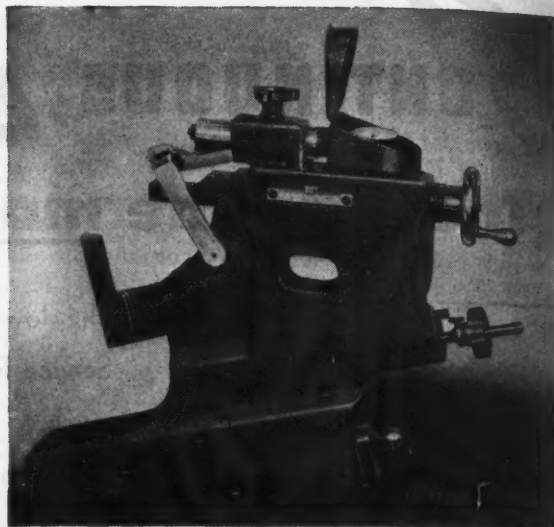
Close-up View of Work-locator and Steadyrest of Machine Shown in Fig. 1
